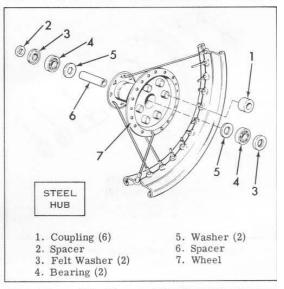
Disassembling Rear Wheel Hub-Steel
